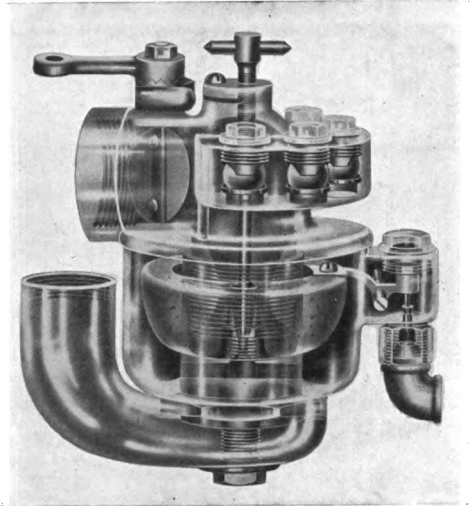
(b).— Ghost View of Kingston Carbureter.
